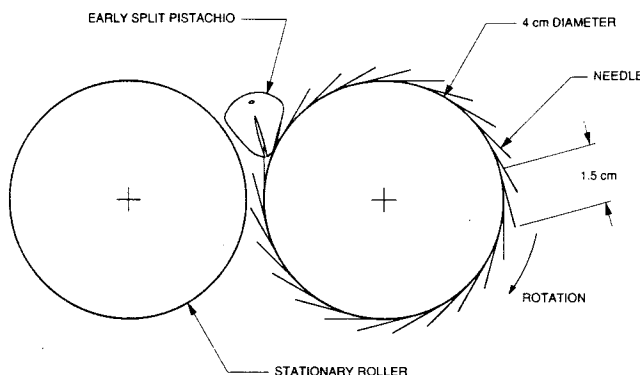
Schematic drawing of the roller and needle mechanical separator.
